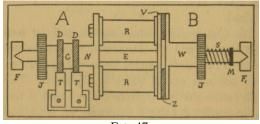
E, spindle; R, bobbins; P, iron cores; D, copper rings; T, brushes; N, back plate; V, front plate; J, gearing; S, spring; H, collar; Z, iron ring; F, fixed bearing; C, insulating bush.
